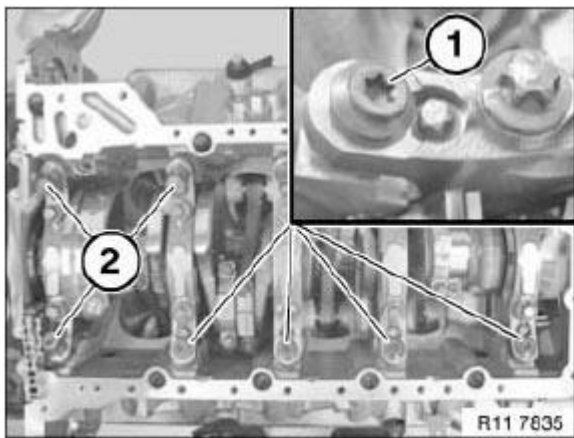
Identifying Main Bearing Taper Screw Connection And Oil Pump Spacer Pins
